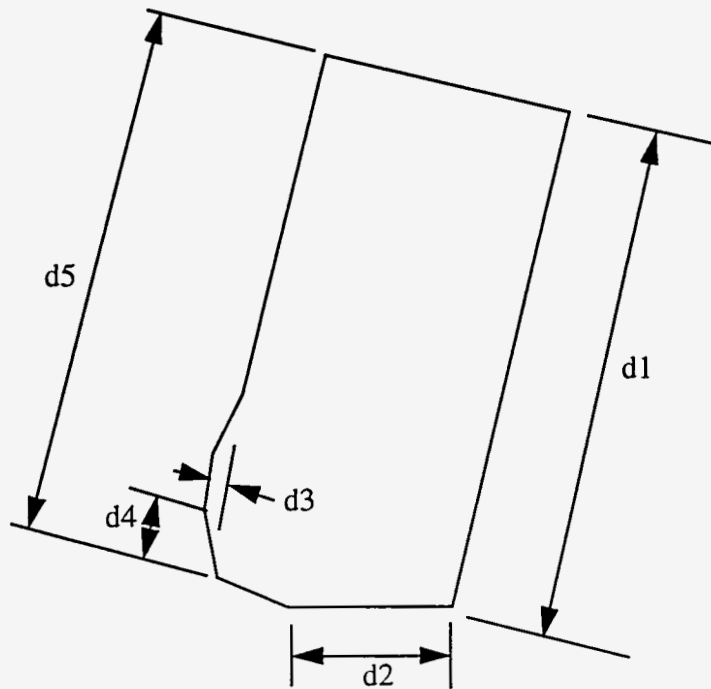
Measured dimensions of deformed CG-over-corner test unit.
